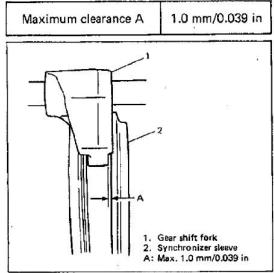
A-62 Checking Sleeve-to-Fork Clearance
